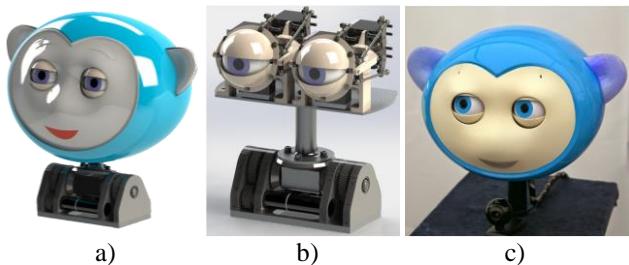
MARKO's head a) 3D model, b) mechanical design of neck and eyes, c) realized head
